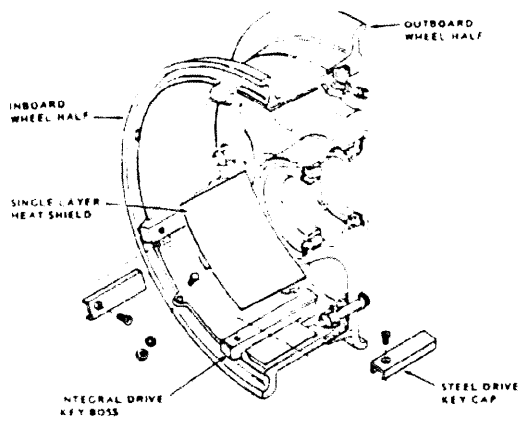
Segmented Wheel Heat Shields (Dunlop)
